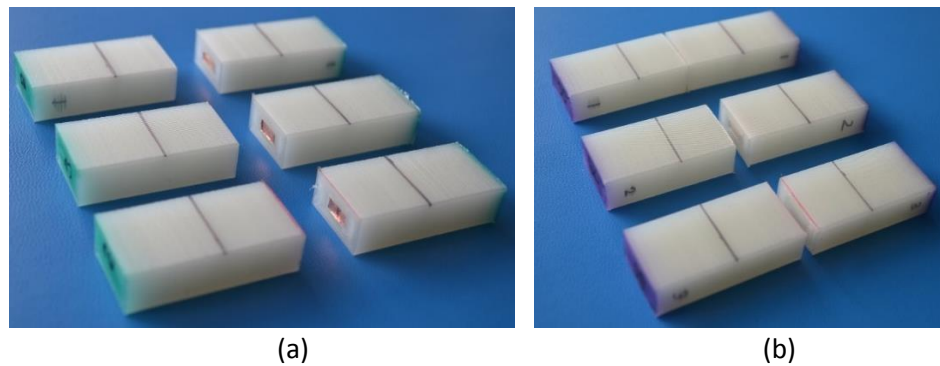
After tensile testing, (a) copper tape and (b) shape converter embedding specimens with demonstrated failure at the pause layer
